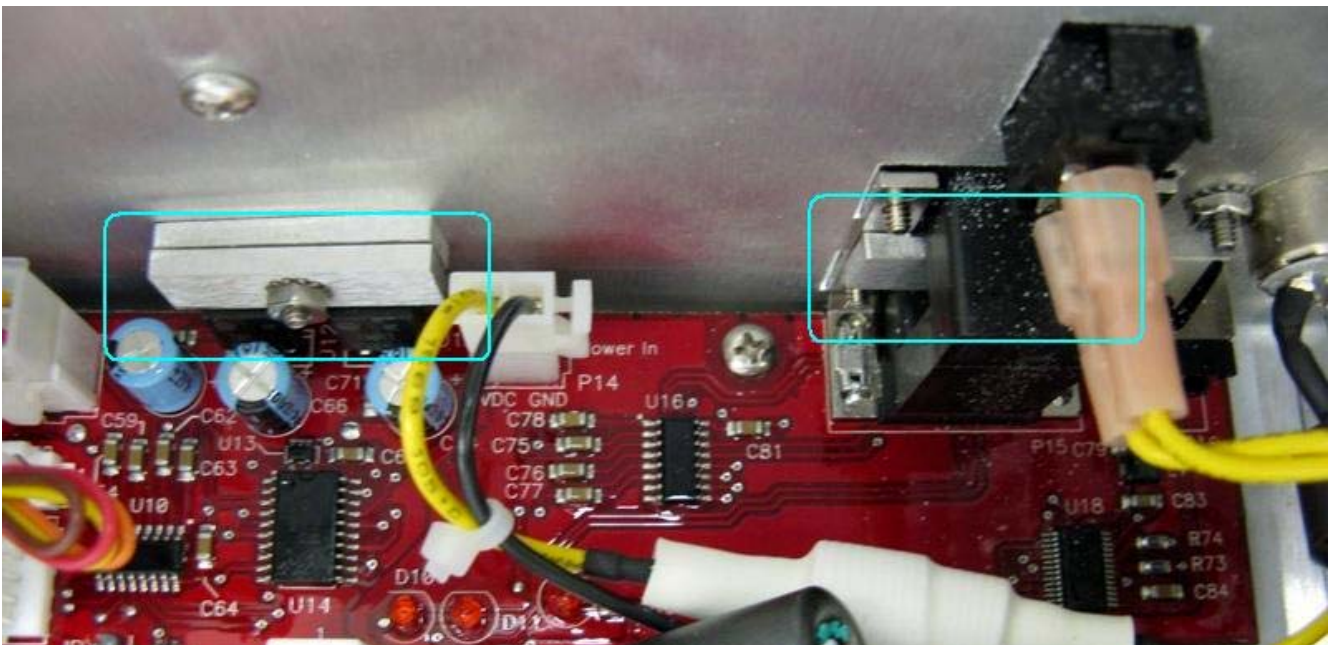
Comm port mounting screw is located on the back side of the sampler.
